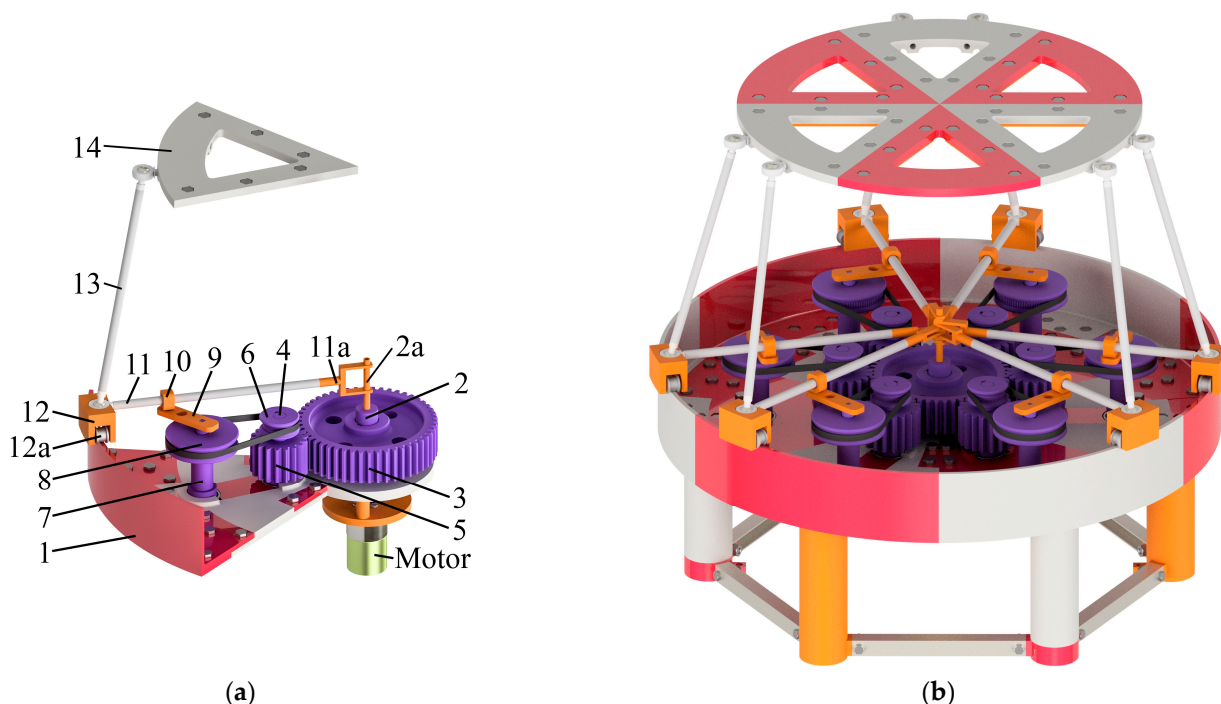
Exploded view of the structural elements assembly (CAD model) of the proposed hexapod: (a) single kinematic chain with a driving part; (b) complete mechanism model.
